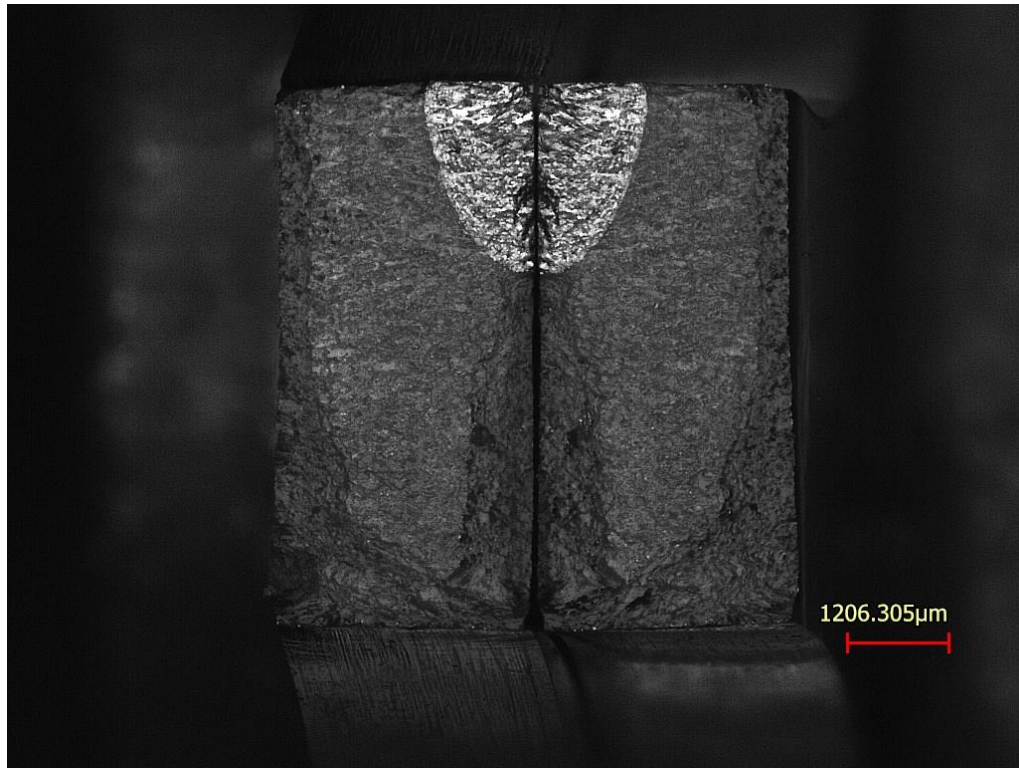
Specimen ES fracture surface (10,000,000 cycles : 71.01 ksi / 489.6 MPa)
